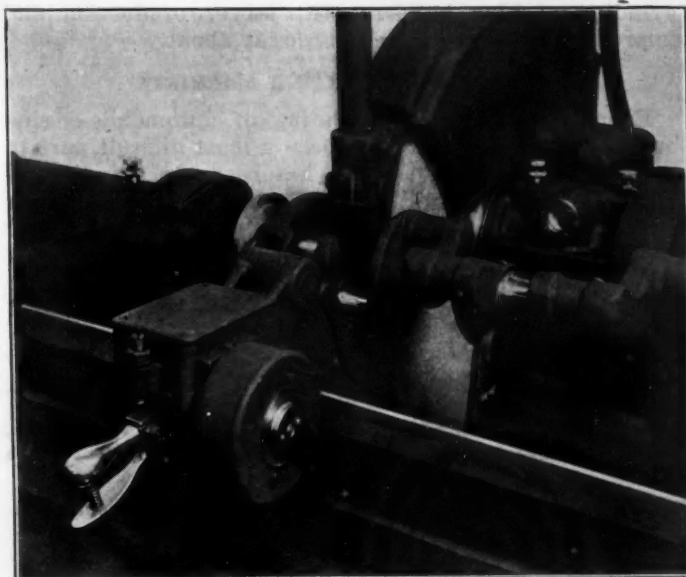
THE AUTOMATIC STEADY-REST USED ON THE CRANKPIN GRINDING MACHINE
